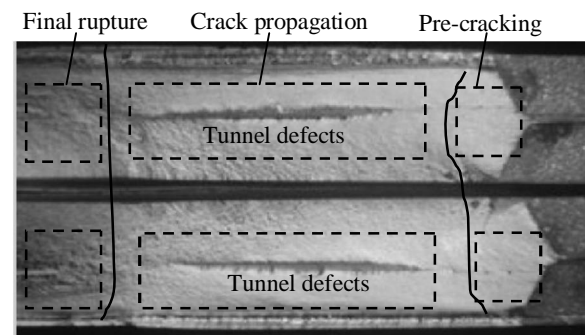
The fracture surface of the specimen that welded by inappropriate welding condition
